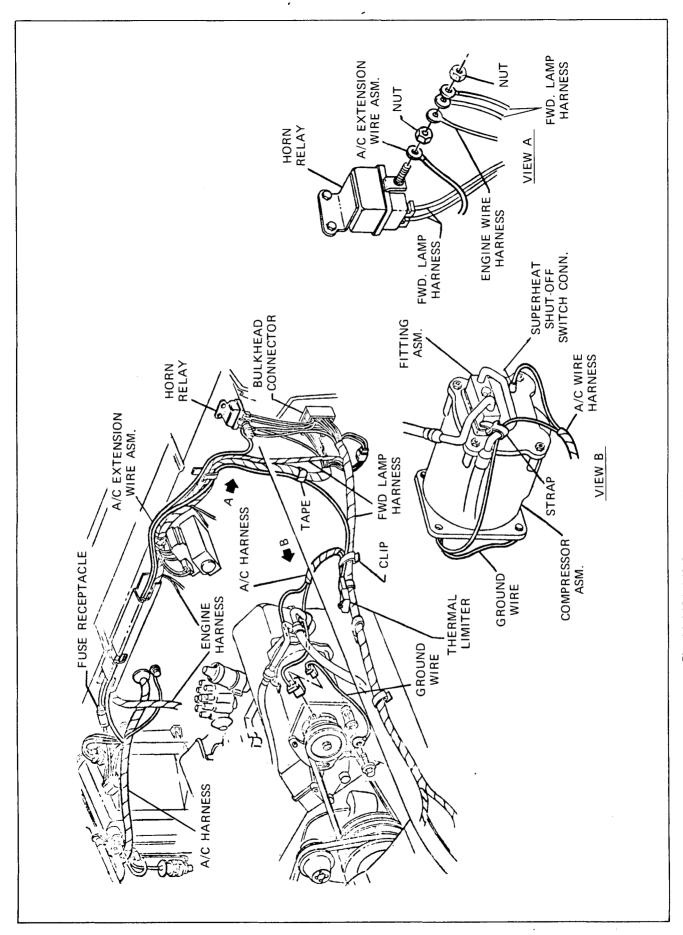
A-142A A/C Compressor Wire Harness Routing - X Series (307 Engine)
